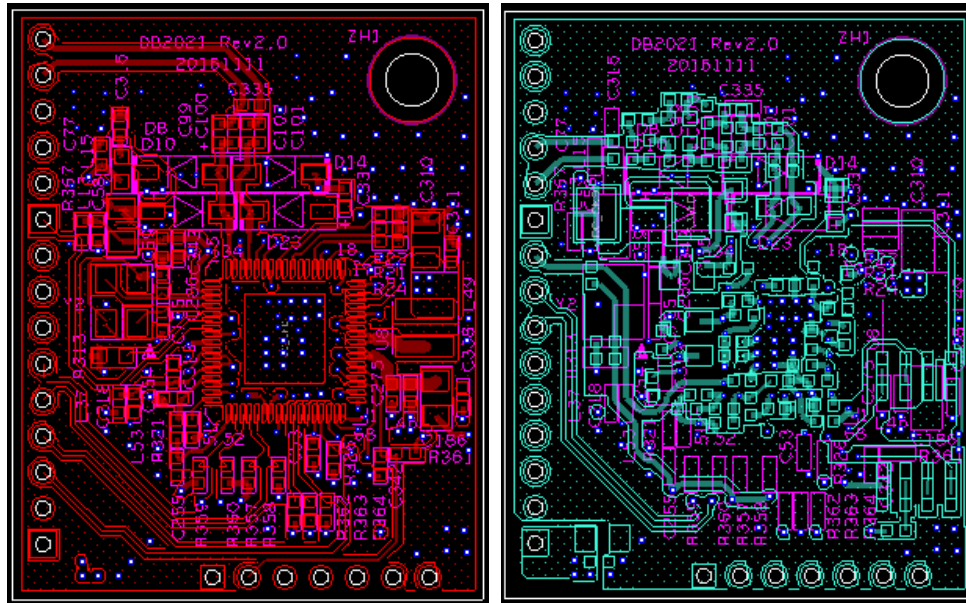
DB2012UIB Board Assembly (Top view and Bottom view)
